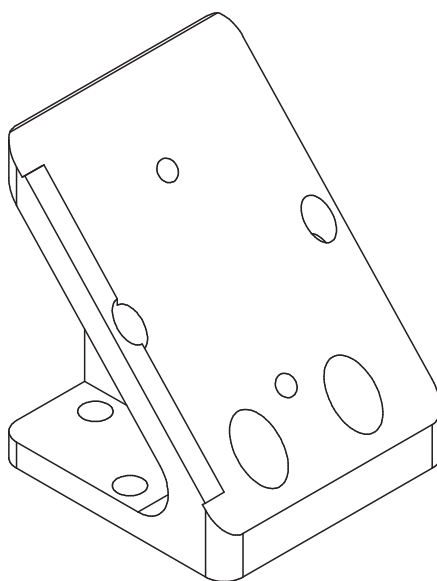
View of 47° mounting adapter for SC25x0 from above (tripod side)
